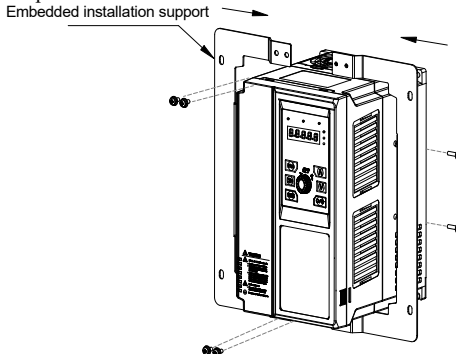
Embedded Support Installation Diagram of Plastic Structure
